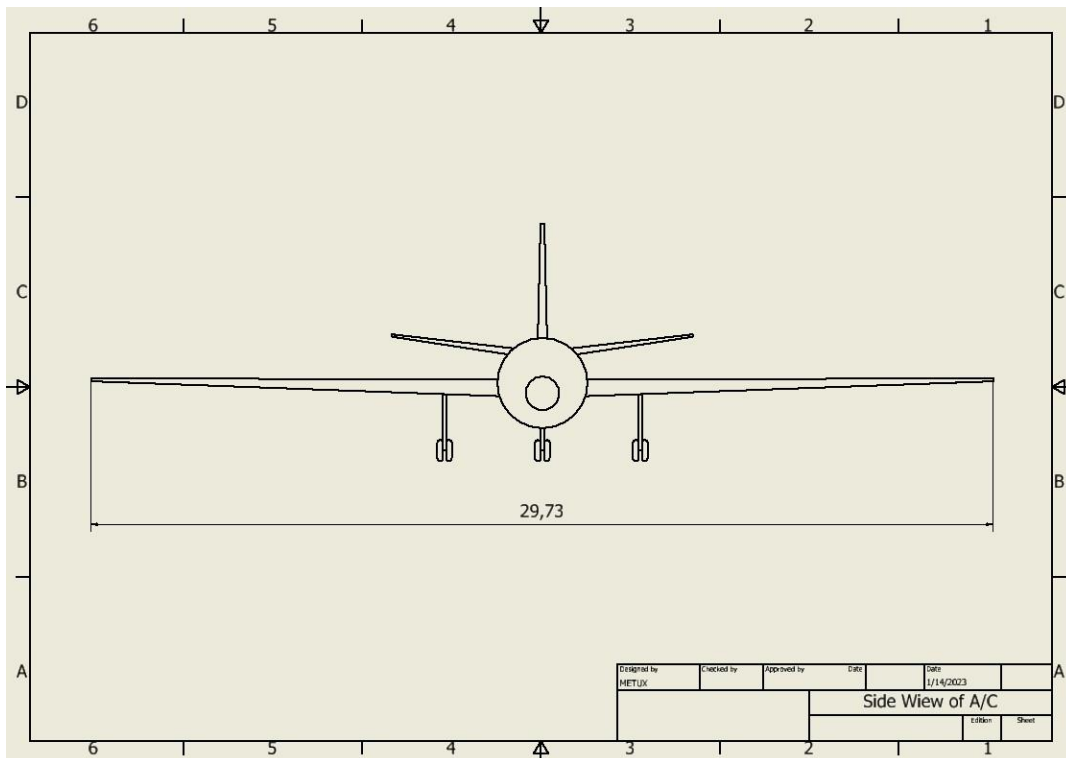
Side view of Business jet aircraft, all dimension in meters
